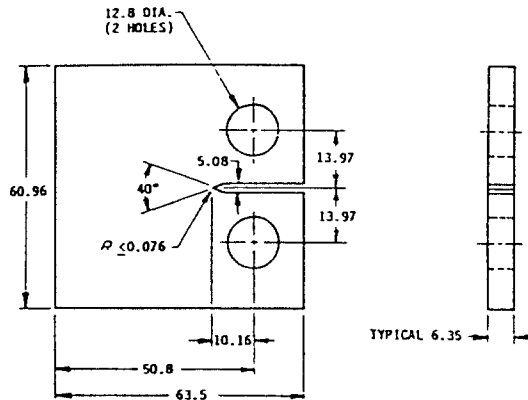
Dimensions of the specimens used for the measurement of fracture toughness(unit: mm)
